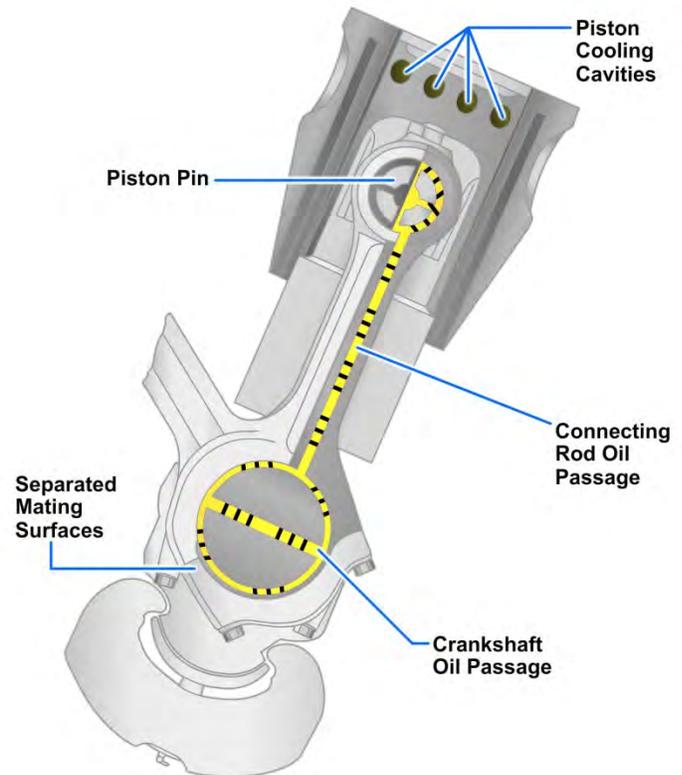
Cutaway view of a connecting rod showing oil passages (Colt-Pielstick).
